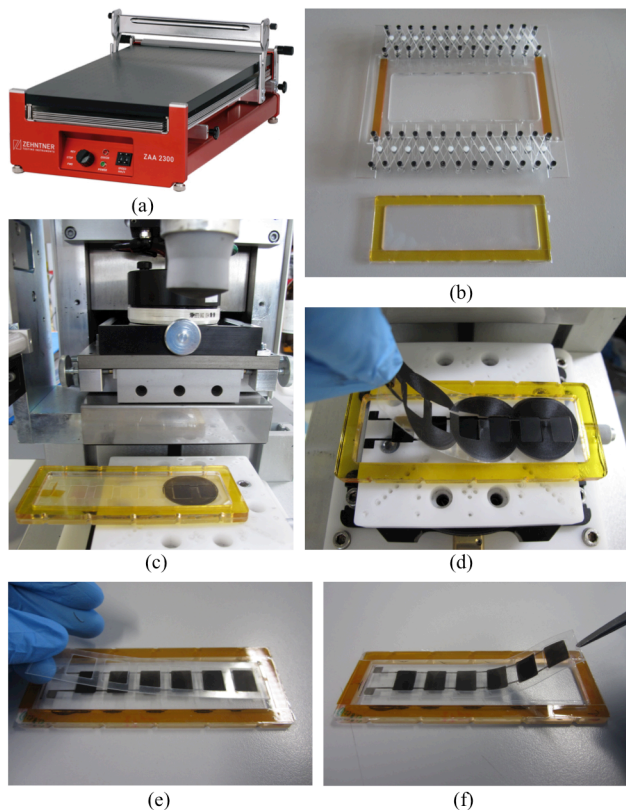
DEMES actuator fabrication: (a) Zehntner automatic film applicator coater used in the elastomer membrane fabrication (picture source [23]). (b) Pure shear prestretching of membranes using custom built stretcher. (c)-(d) Pad-printing of electrodes through a PET foil mask; (e) Bonding of actuator frame to the elastomer membrane. (f) Releasing of finished actuator.
